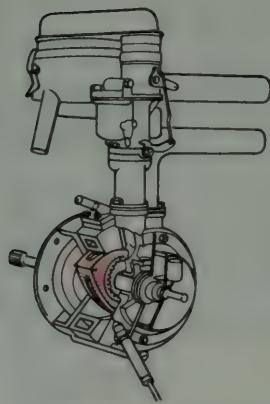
SECTION THROUGH A ROTARY PISTON ENGINE
